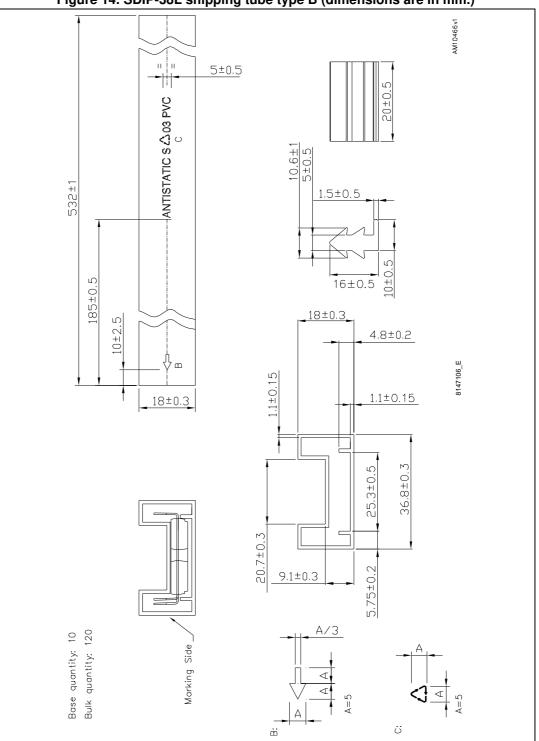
SDIP-38L shipping tube type B (dimensions are in mm.)
